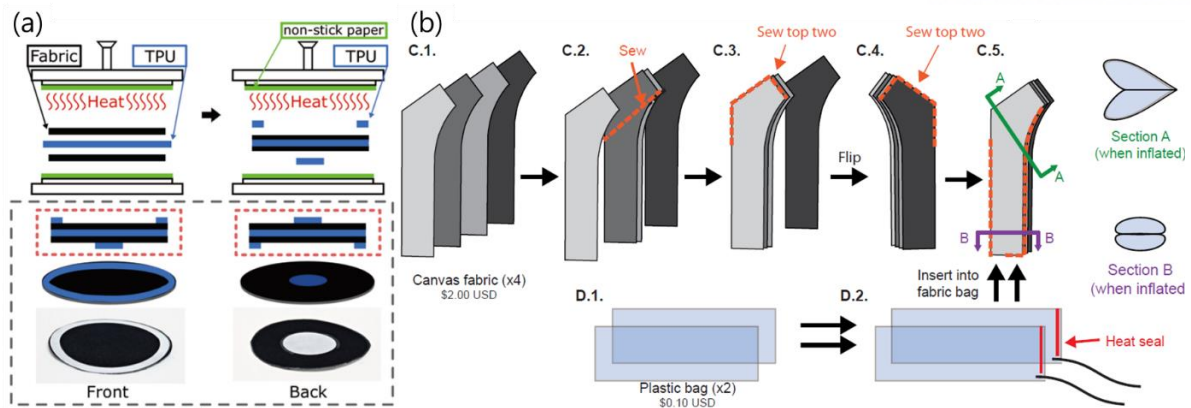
A new type of fabrication methods: (a) heat press [24], (b) heat sealing and sewing [25]
